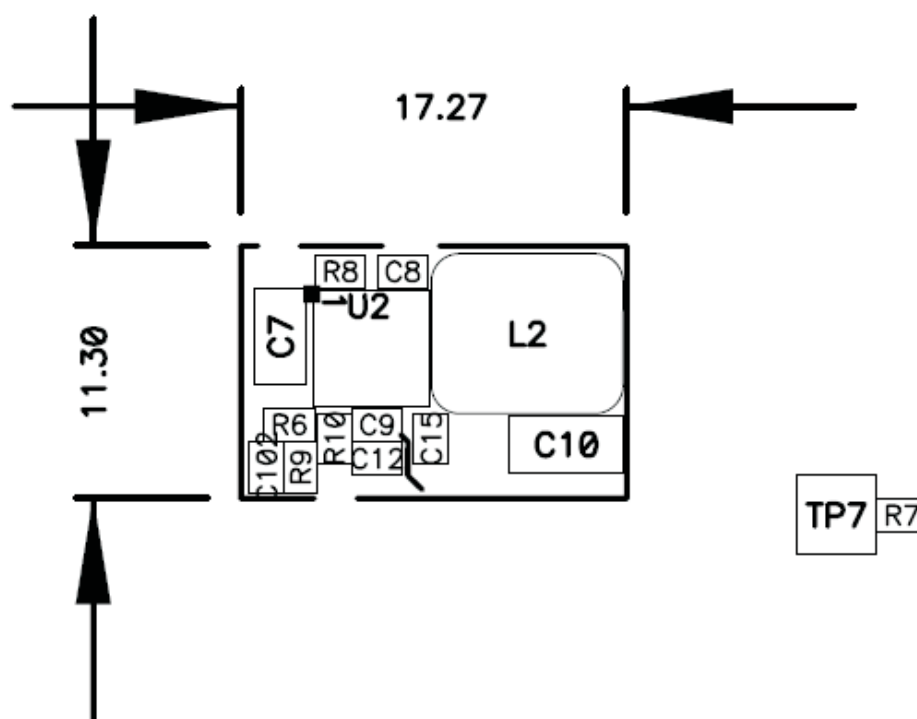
Ultra-Small PCB Layout Using TPS54821 (PMP4854-2)
